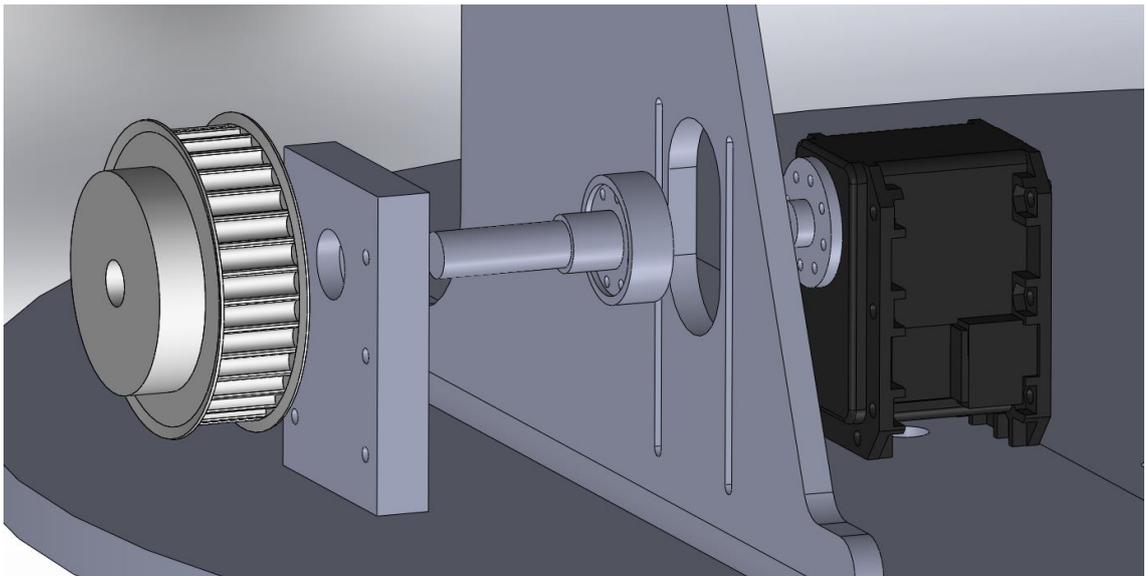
Exploded view of the driver part of the timing belt after the modifications mentioned above
